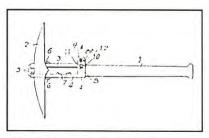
This sleeve for coal picks is a mechanical version which clamped around the end of the handle and featured a locking hasp secured with a bold. Ashbell Willard patented this in Benton, Illinois in 1917. (Pat 1,248,993)
